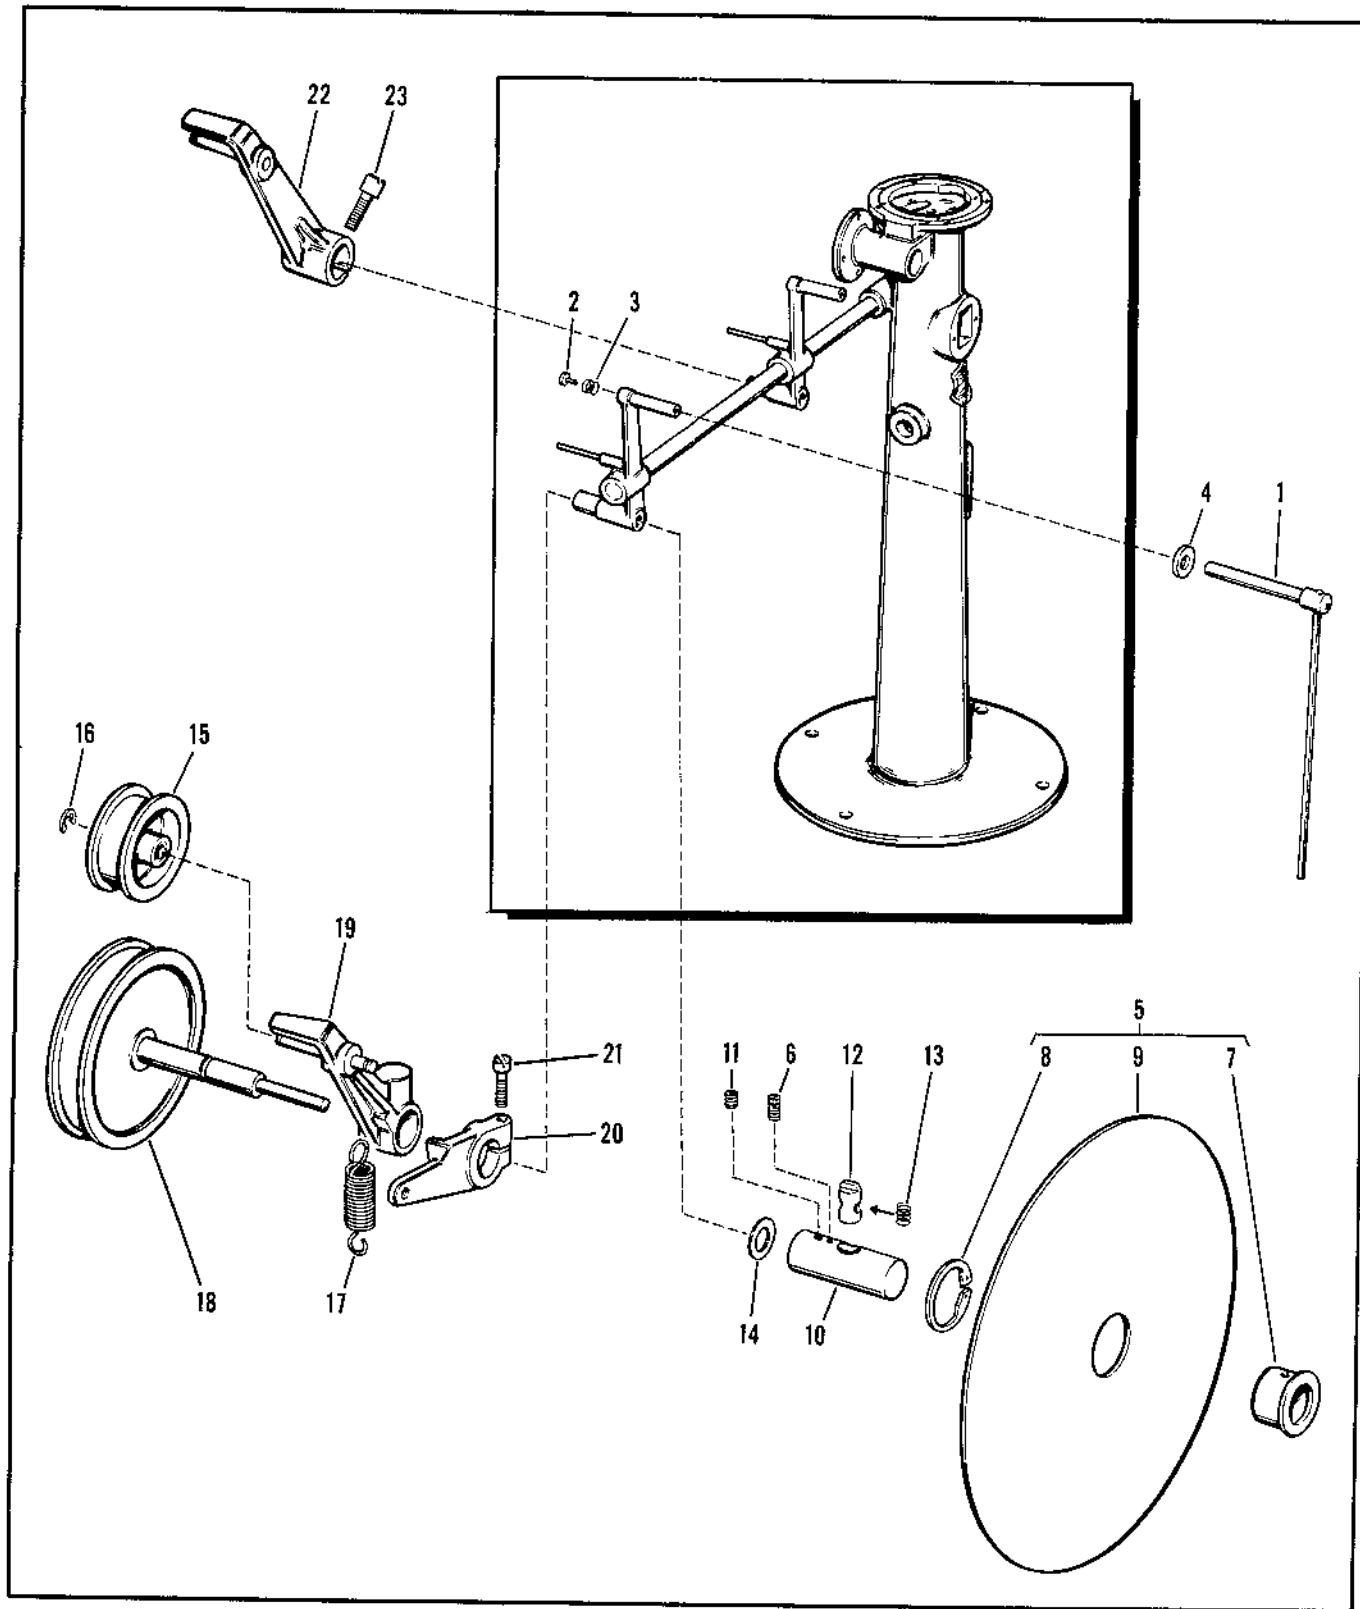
Pedestal Assembly - Sheet 1 of 2 Sheets
